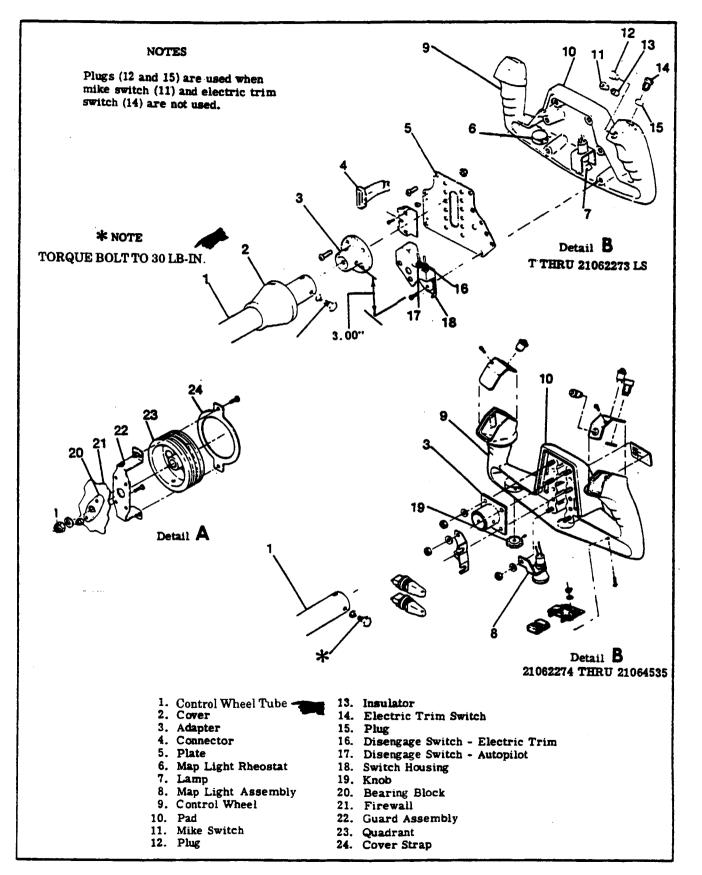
Control Column Installation (Sheet 3 of 5)
